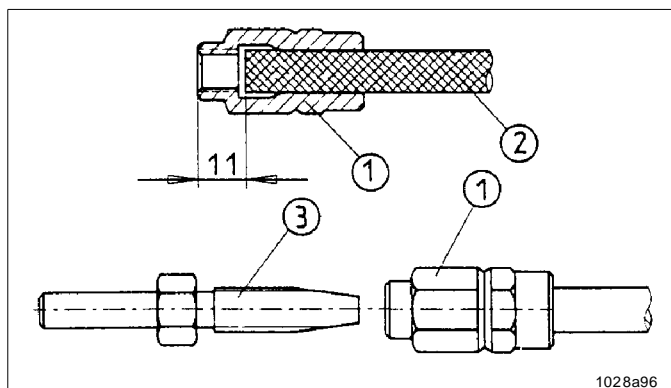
Pre-assembly of the threaded sleeves and hose studs onto the main line
